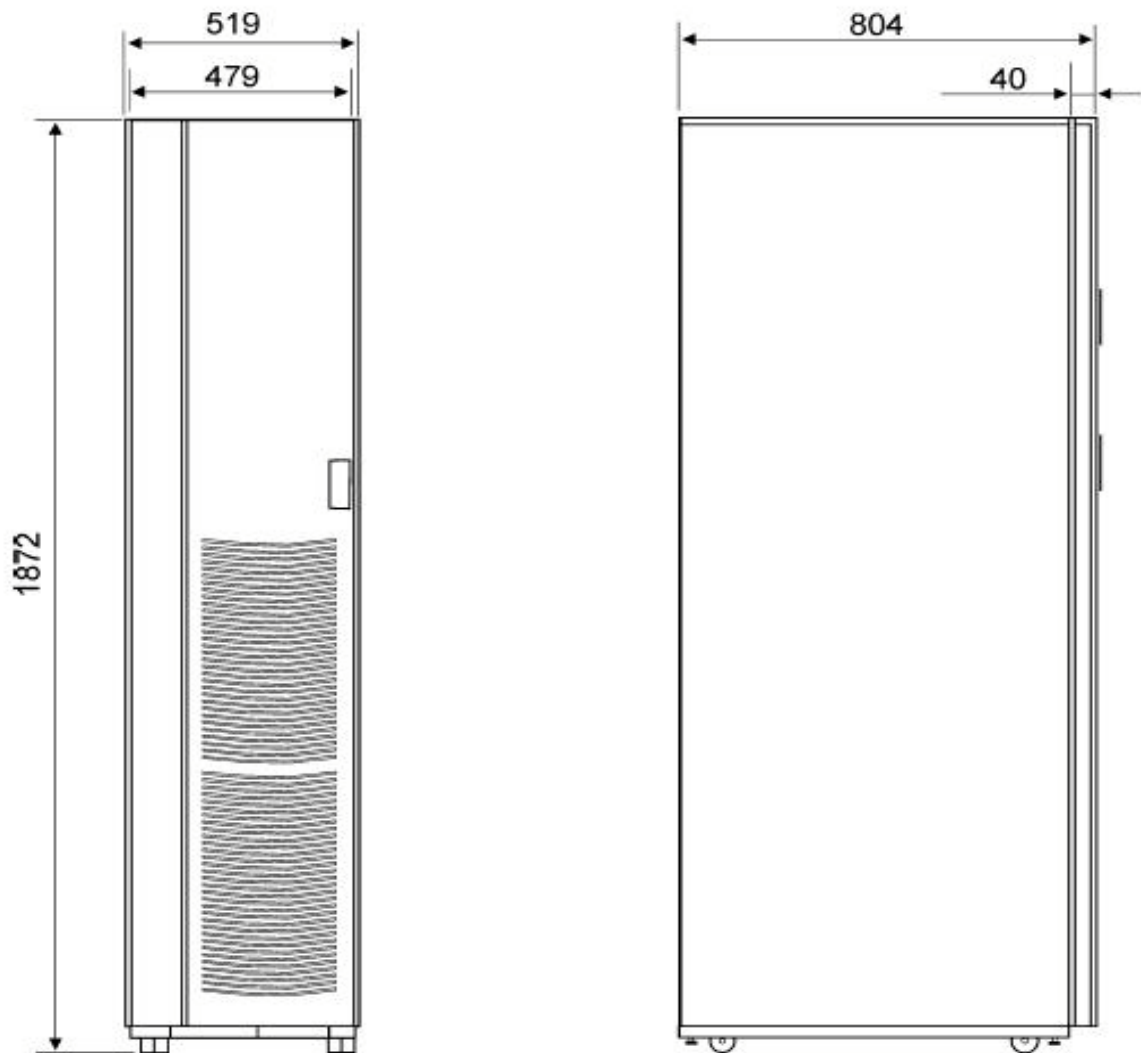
Dimensions of the 120/160 kVA Tie cabinet
